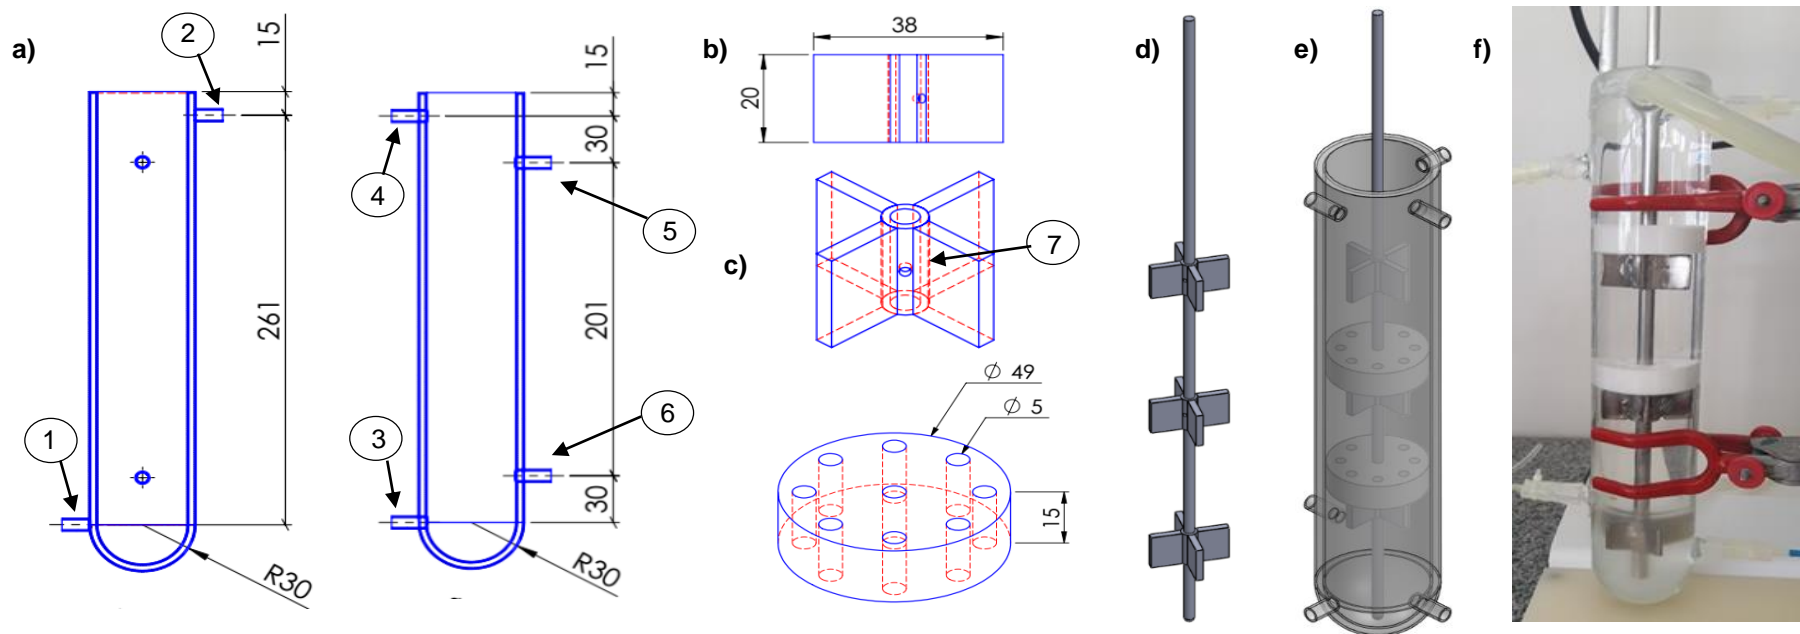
Design of column reactor and its constituents. a) dimensions of the reactor; b) dimensions of impellers; c) dimensions of the centralizer; d) axis and equidistant impellers; e) assembly of the reactor and f) real reactor. All dimensions are in millimeters. Points 1 and 2 are part of the temperature control system through the reactor jacketed. The samples were collected by points 3 and/or 4, and feeds were performed at points 5 and/or 6. The position of the impellers on the axis can be adjusted by the screw positioned in point 7.
